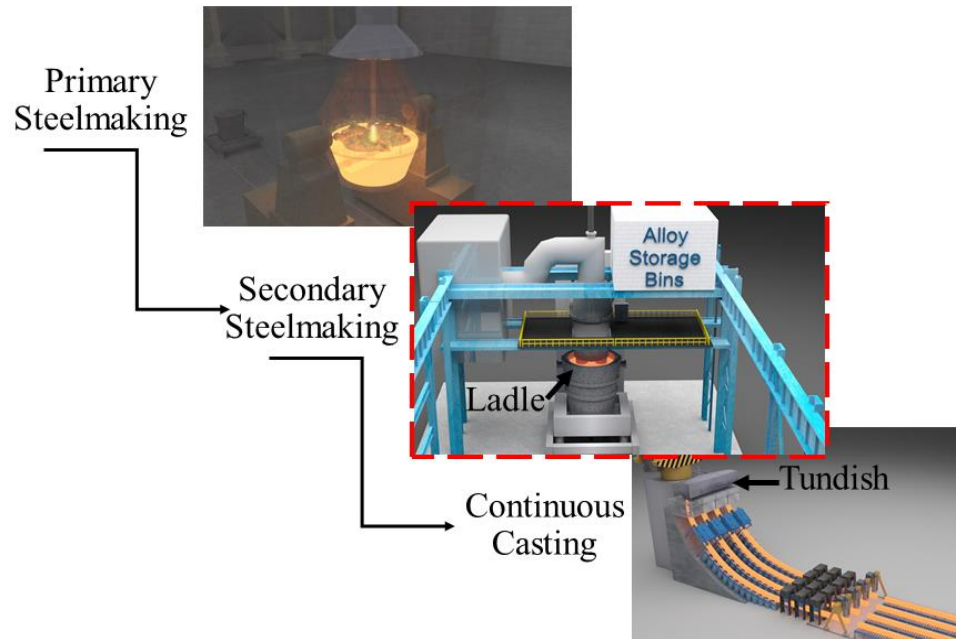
Overview of the steelmaking process showing primary steelmaking, secondary steelmaking and continuous casting [21]
